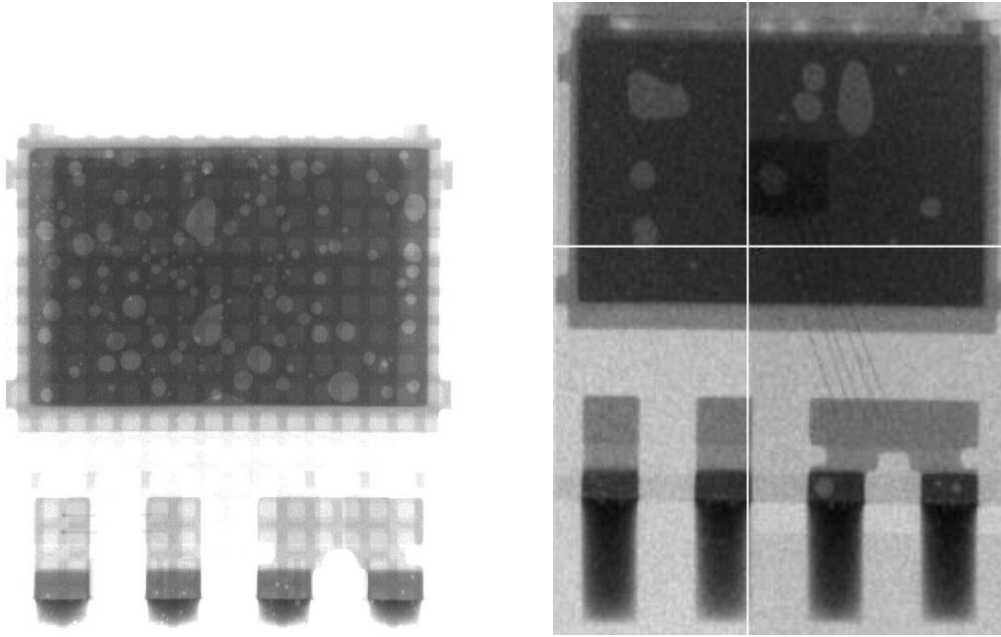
X-ray photos of a reflow soldered VDSO4 (left) , and a wave soldered VDSO4 (right).
